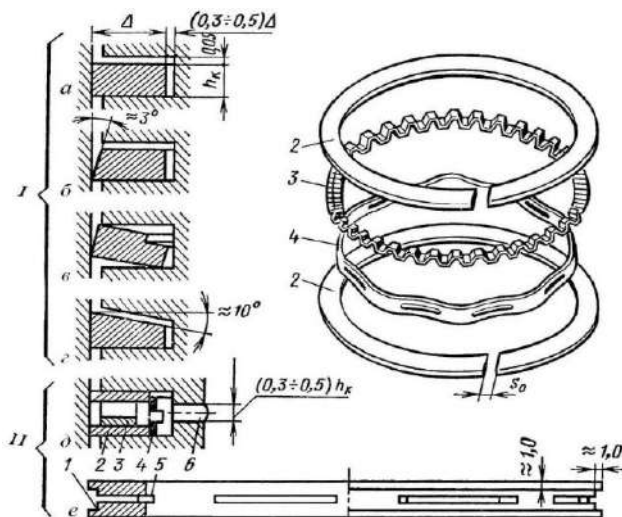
Piston rings: I – compression rings (position in the piston groove in working condition); II – oil scraper rings; *a* – rectangular cross-section; *b* – trapezoidal cross-section (with a conical outer surface); *in* – with a step on the inner surface; *g* – wedge-shaped cross-section; *d* – folded; *there are* – solid; 1 – oil collecting groove; 2 – flat ring; 3 – axial expander; 4 – radial expander; 5 – drainage slot; 6 – drainage hole in the piston; h_k – ring height
